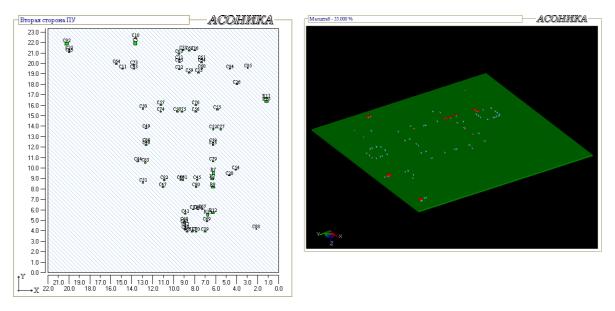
Design of printed assembly in the subsystem ASONIKA-TM (Side 2)
